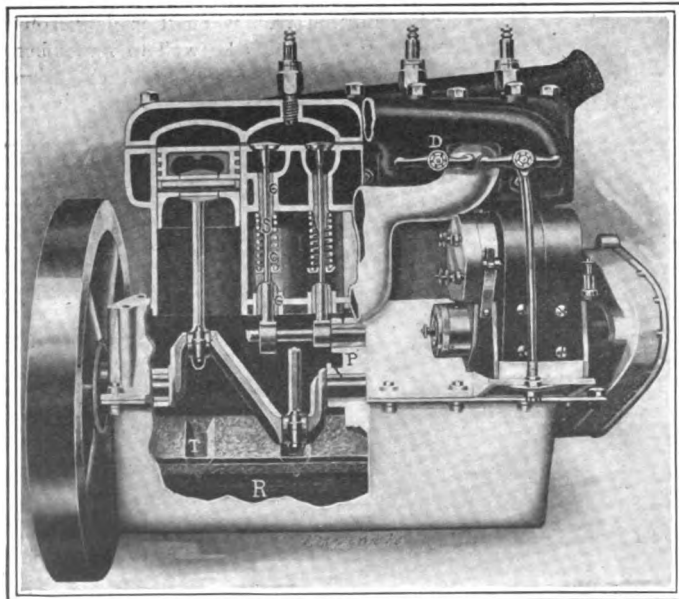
Semi-sectional view through the Metz 22-horsepower motor
